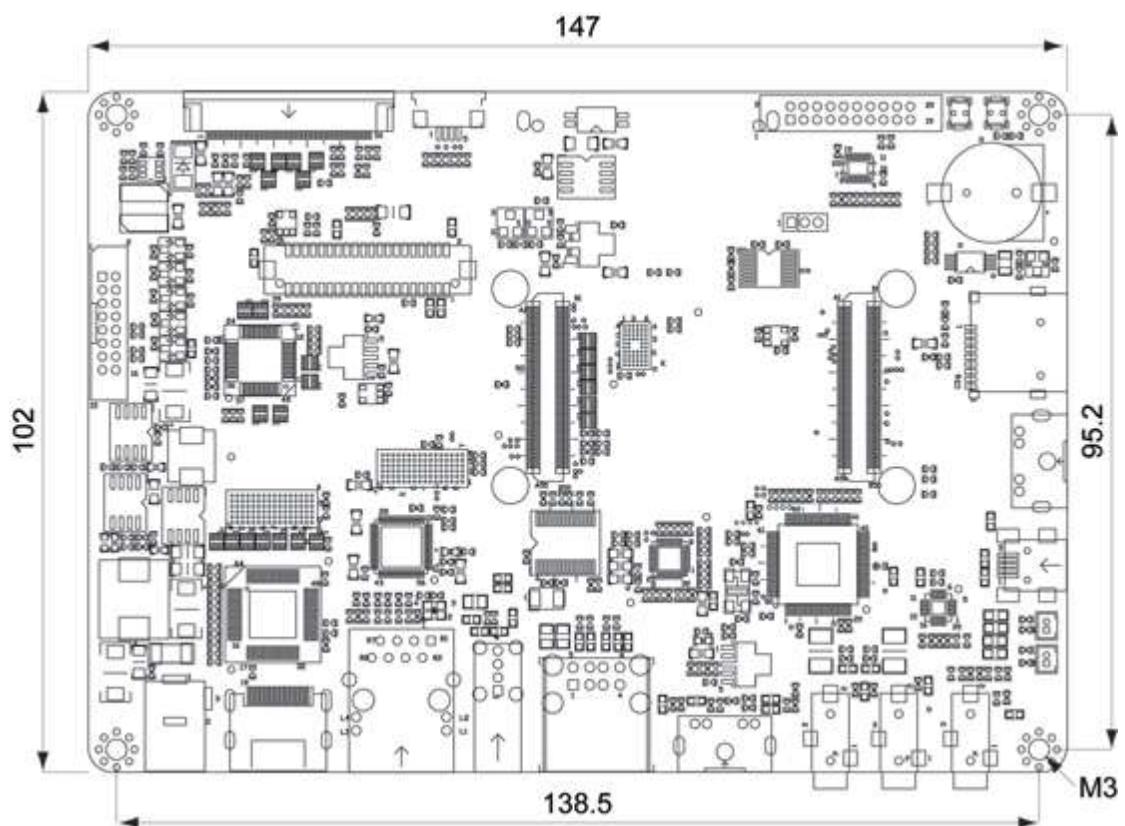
Tsunami Baseboard dimensions (Dimensions in mm)
